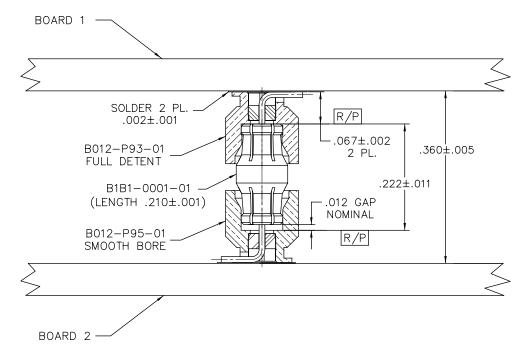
GPPO Board-to-Board Tolerance Analysis
